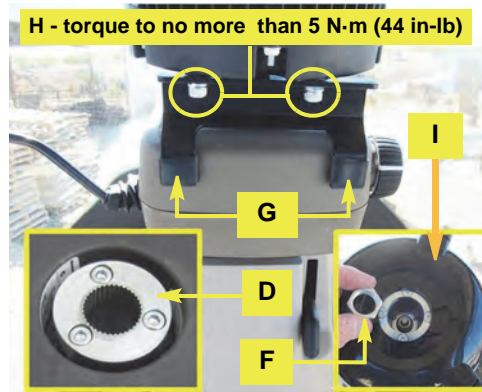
with insets: Installing the steering wheel and anti-rotation bracket
